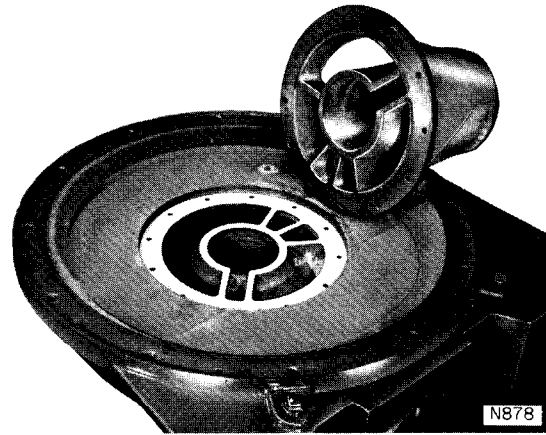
Aligning Cone Ports with Ports in Head, Model P, R, S and T Pumps
